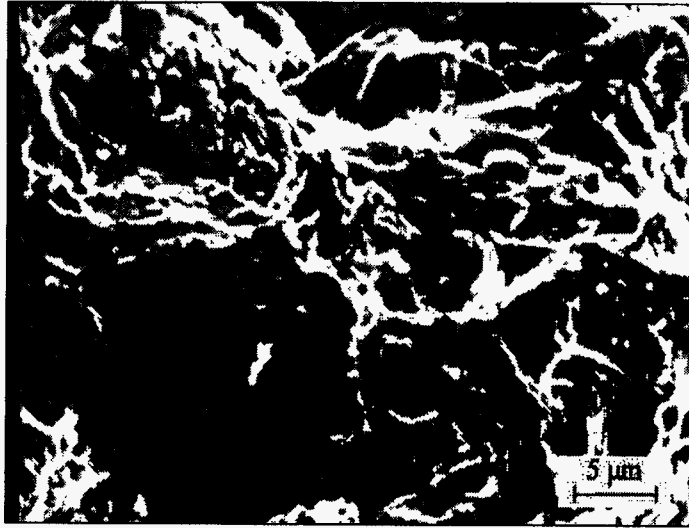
Fracture Surface after Uniaxial Tensile Testing of Aluminum 356 Alloy, Showing Pores
